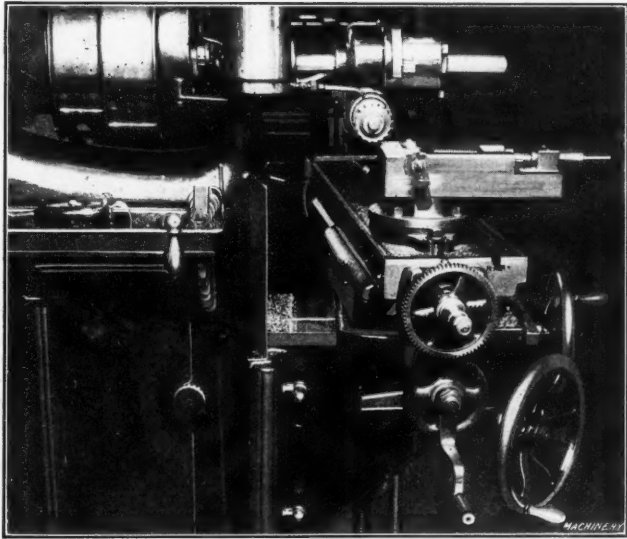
Universal Milling Machine Attachment for Use in cutting Accurate Racks
